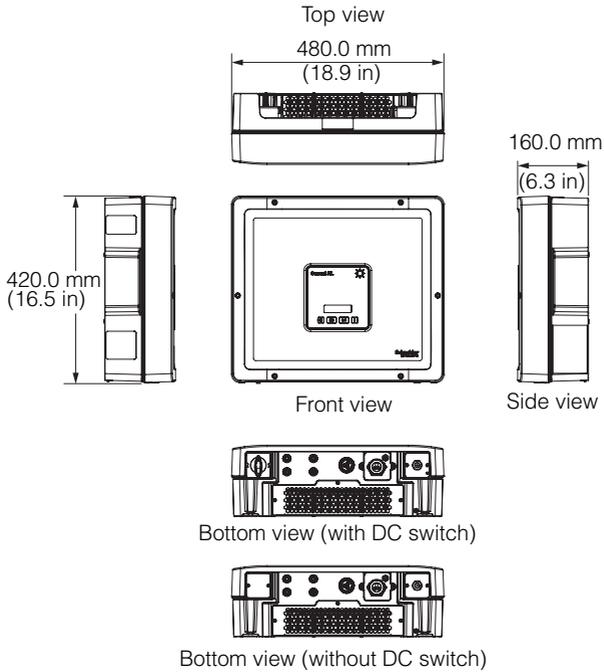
Views and dimensions of Conext RL 3000 E-S/ 3000 E
